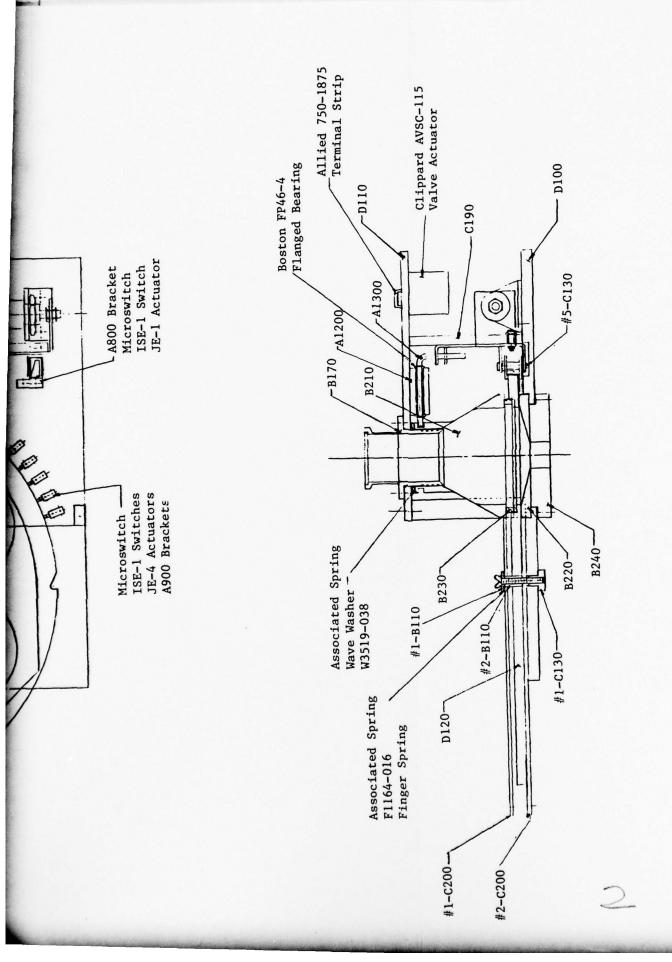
ASSEMBLY DRAWING FOR THE MASS SAMPLING TURRET
